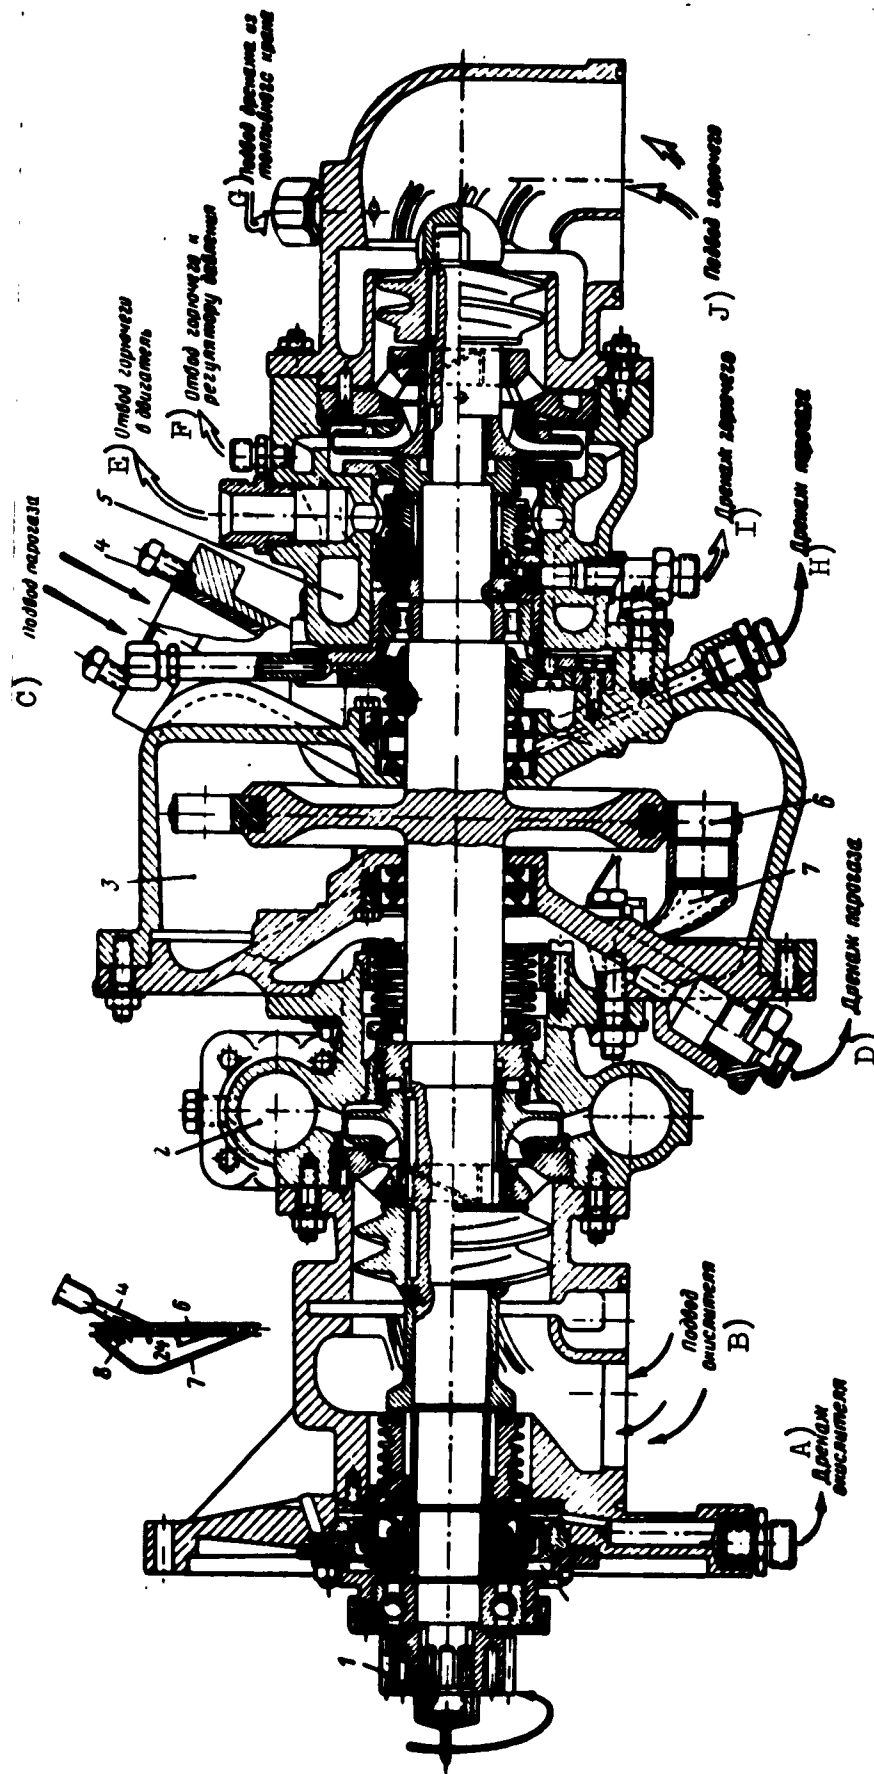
Section through TNA of "Walter" ZhrD. 1) Gear; 2) oxidizer pump; 3) turbine; 4) nozzle; 5) combustible pump; 6) turbine wheel with blades; 7) rotary chamber; 8) entrance buckets. A) Oxidizer drainage; B) oxidizer supply; C) vapor-gas supply; D) vapor-gas drainage; E) combustible takeoff to engine; F) combustible takeoff to pressure regulator; G) drainage supply from fuel cock; H) vapor-gas drainage; I) combustible drainage; J) combustible supply.
